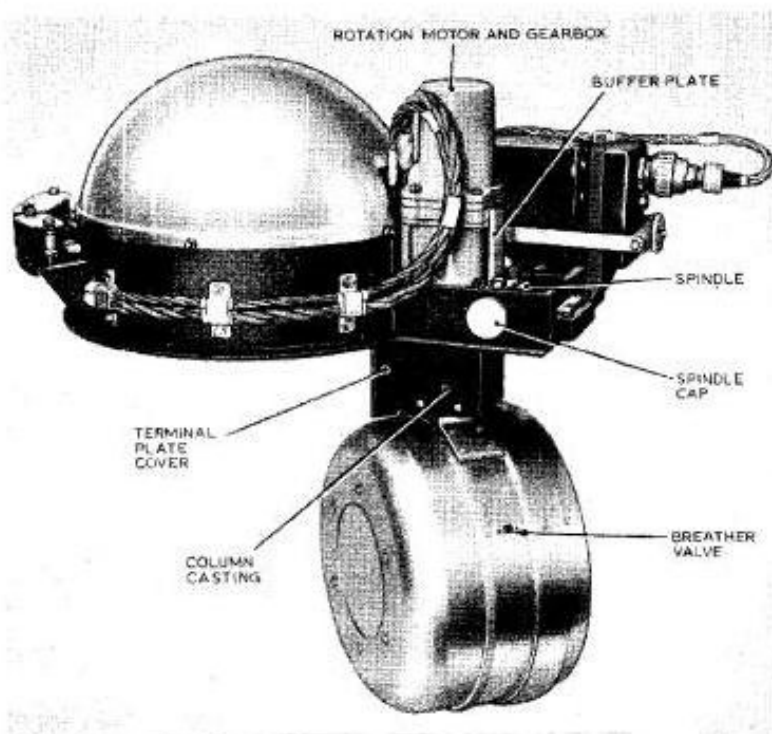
Landing lamp, side view with filament housing partially rotated (Pre-Mod. 1)
